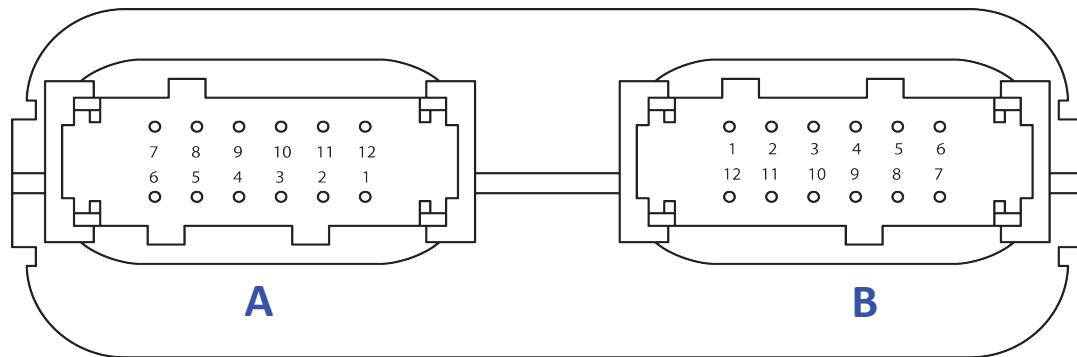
HEC-150x-E-R A / B Connector Front View
